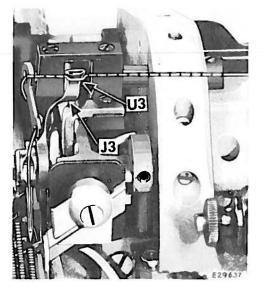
Needle Thread Controller 164151 in Correct Relation to Needle Thread
